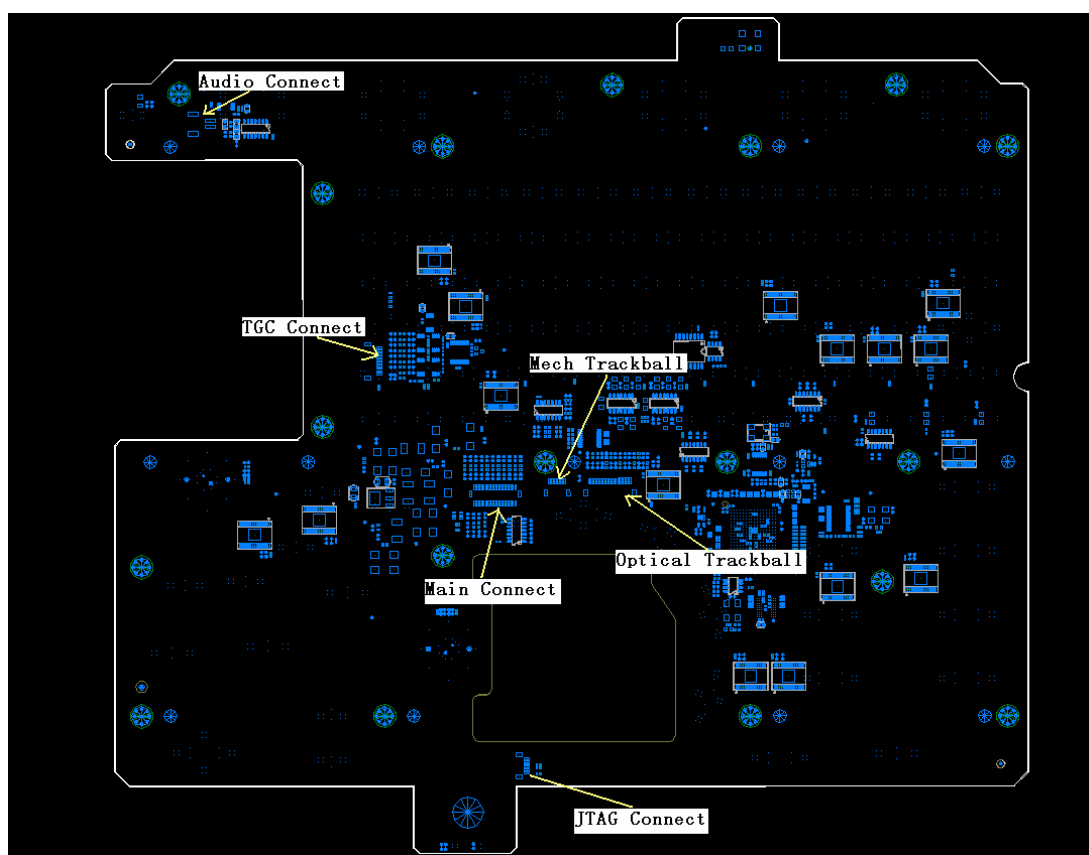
Components Layout of the Control Panel Board (Bottom)
